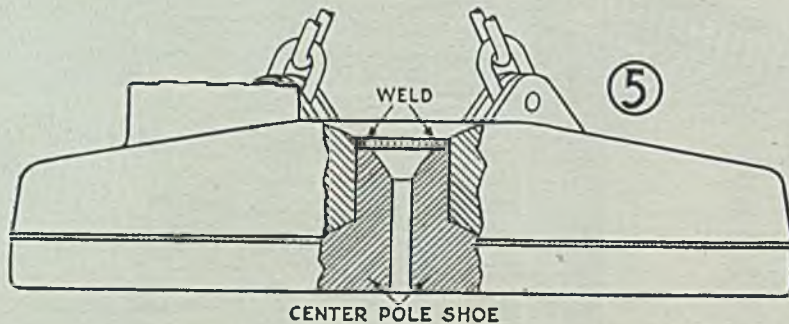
Arrangement of design for welding center pole shoe to housing
